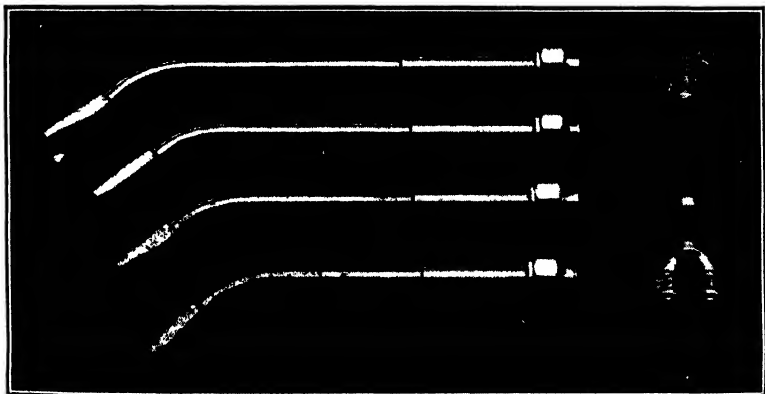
Double flame blowpipe for rightward welding—one flame preheats,
